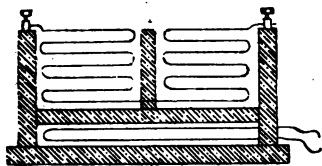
Sectional Winding of the Secondary of a Spark Coil.
